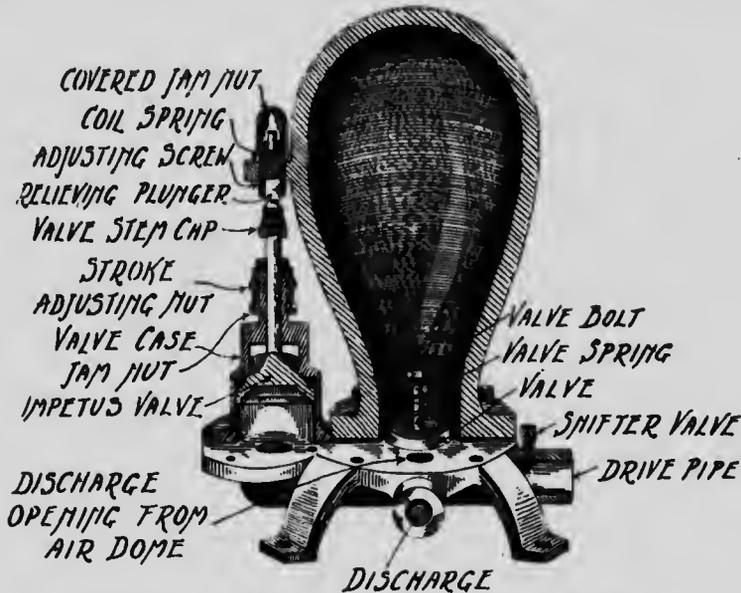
(b) Section of hydraulic ram, showing parts.
